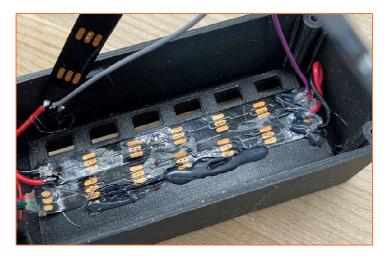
2 out of 3 hot-glued LED strips. Glue on the solder pads also help prevent shorts during assembly
